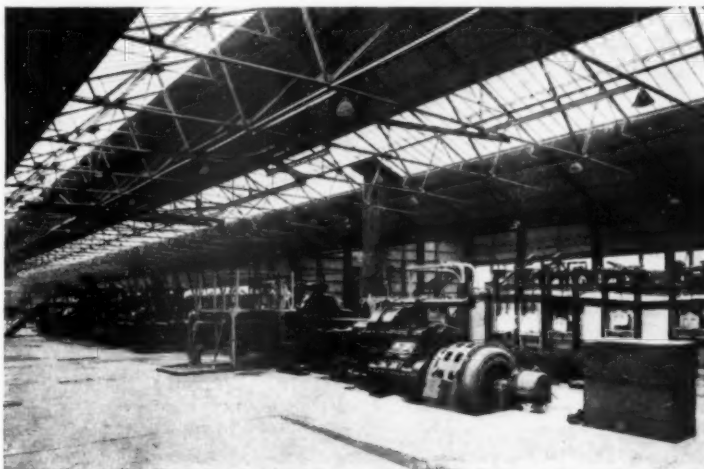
General view of the mill of the Jarrow Tube Co., Ltd., showing the piercer mill in the foreground.
